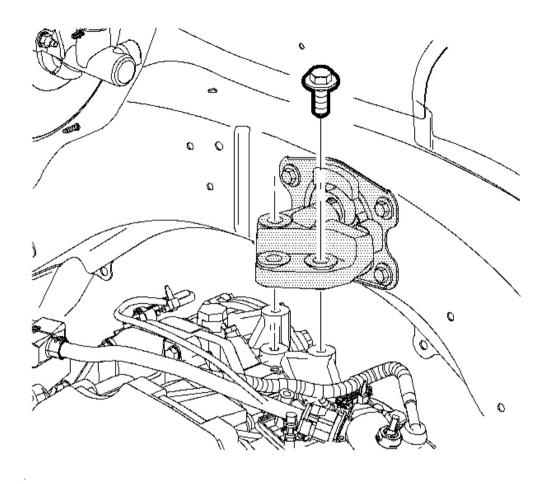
Left Transmission Mount & Bolts Courtesy of GENERAL MOTORS CORP.
